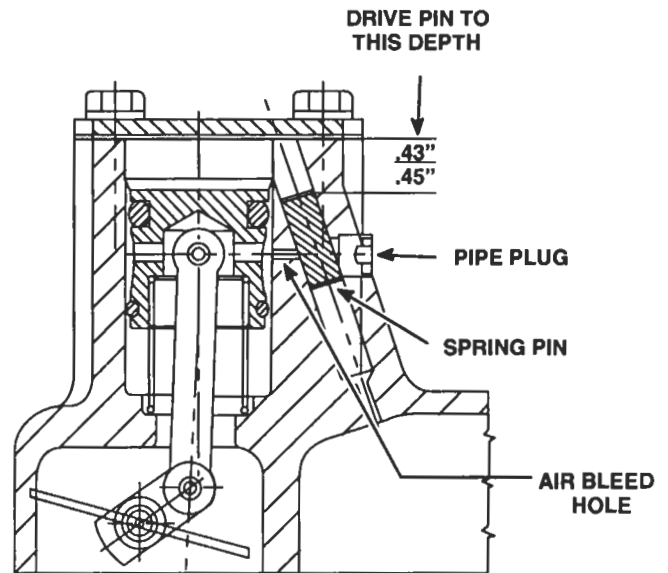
Valve Tower Cross-Section View Showing Spring Installed
